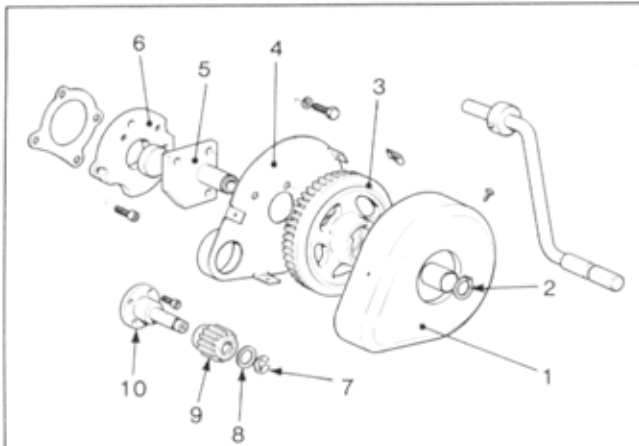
3.5:1 Handstart Roller Clutch Gear End : Exploded View
